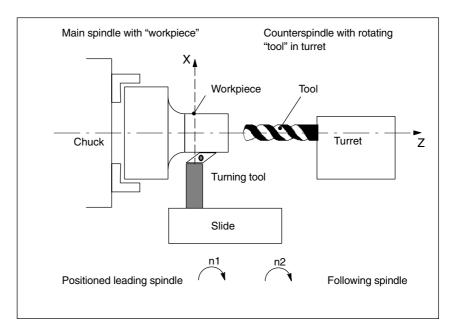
Application on a single-slide turning machine with turret about Z axis
